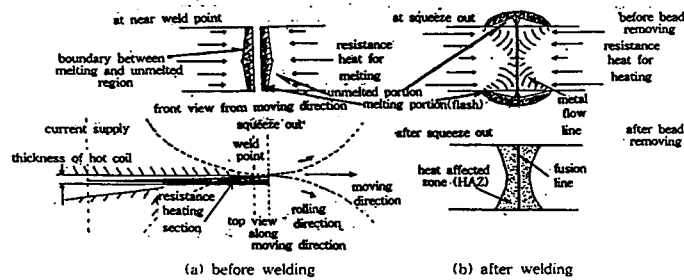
Schematic view of weld section before and after high frequency electric resistance welding
